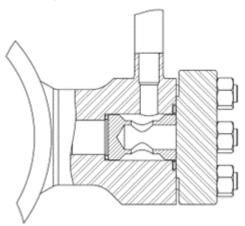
DSH Hydro-testing fixture shown with solid end to isolate the water line from the steam line.
